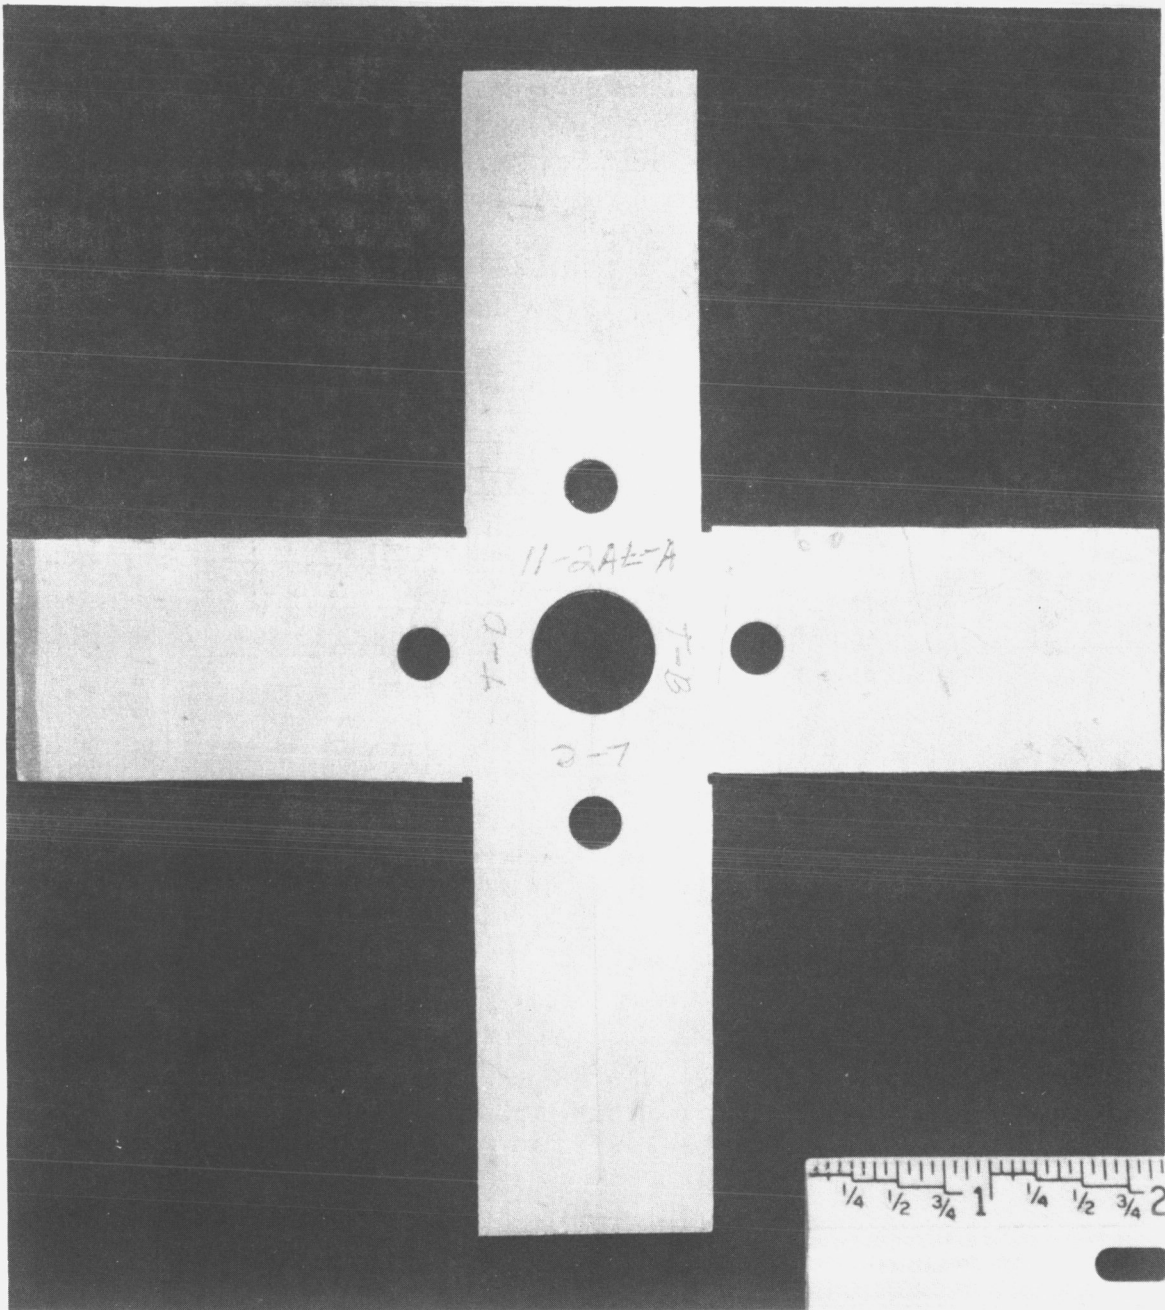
MASTER SPECIMEN FOR MACHINING COUPONS
